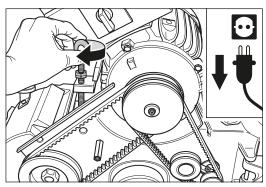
Mount the V-belts and tension them by turning the eye bolt at the motor clockwise.
